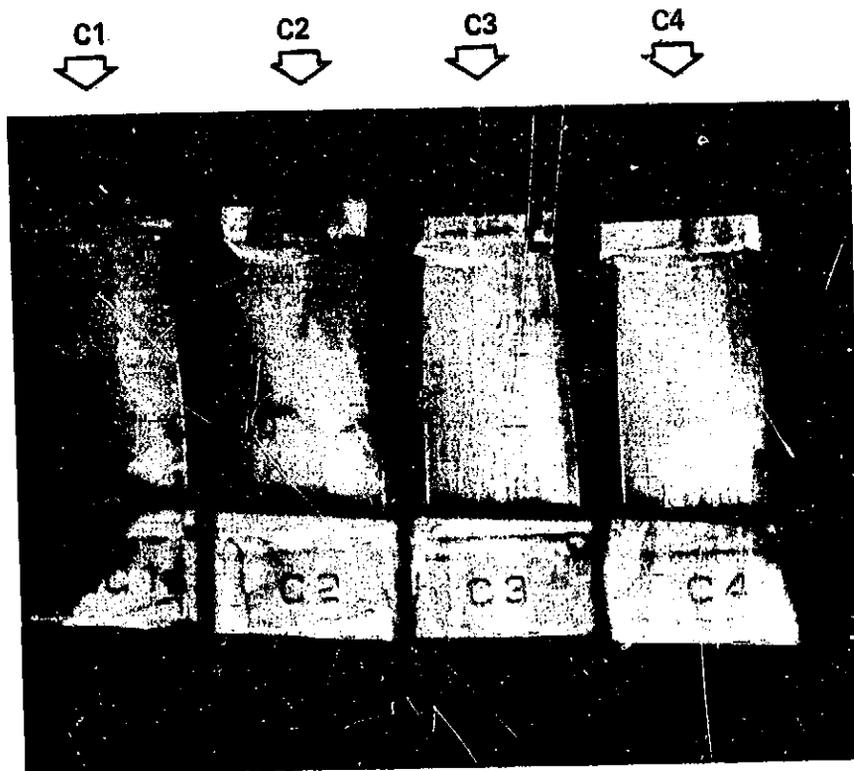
Task I, Mold 4 Blades Showing Straight Columnar Grains in Castings "C3" and "C4"
